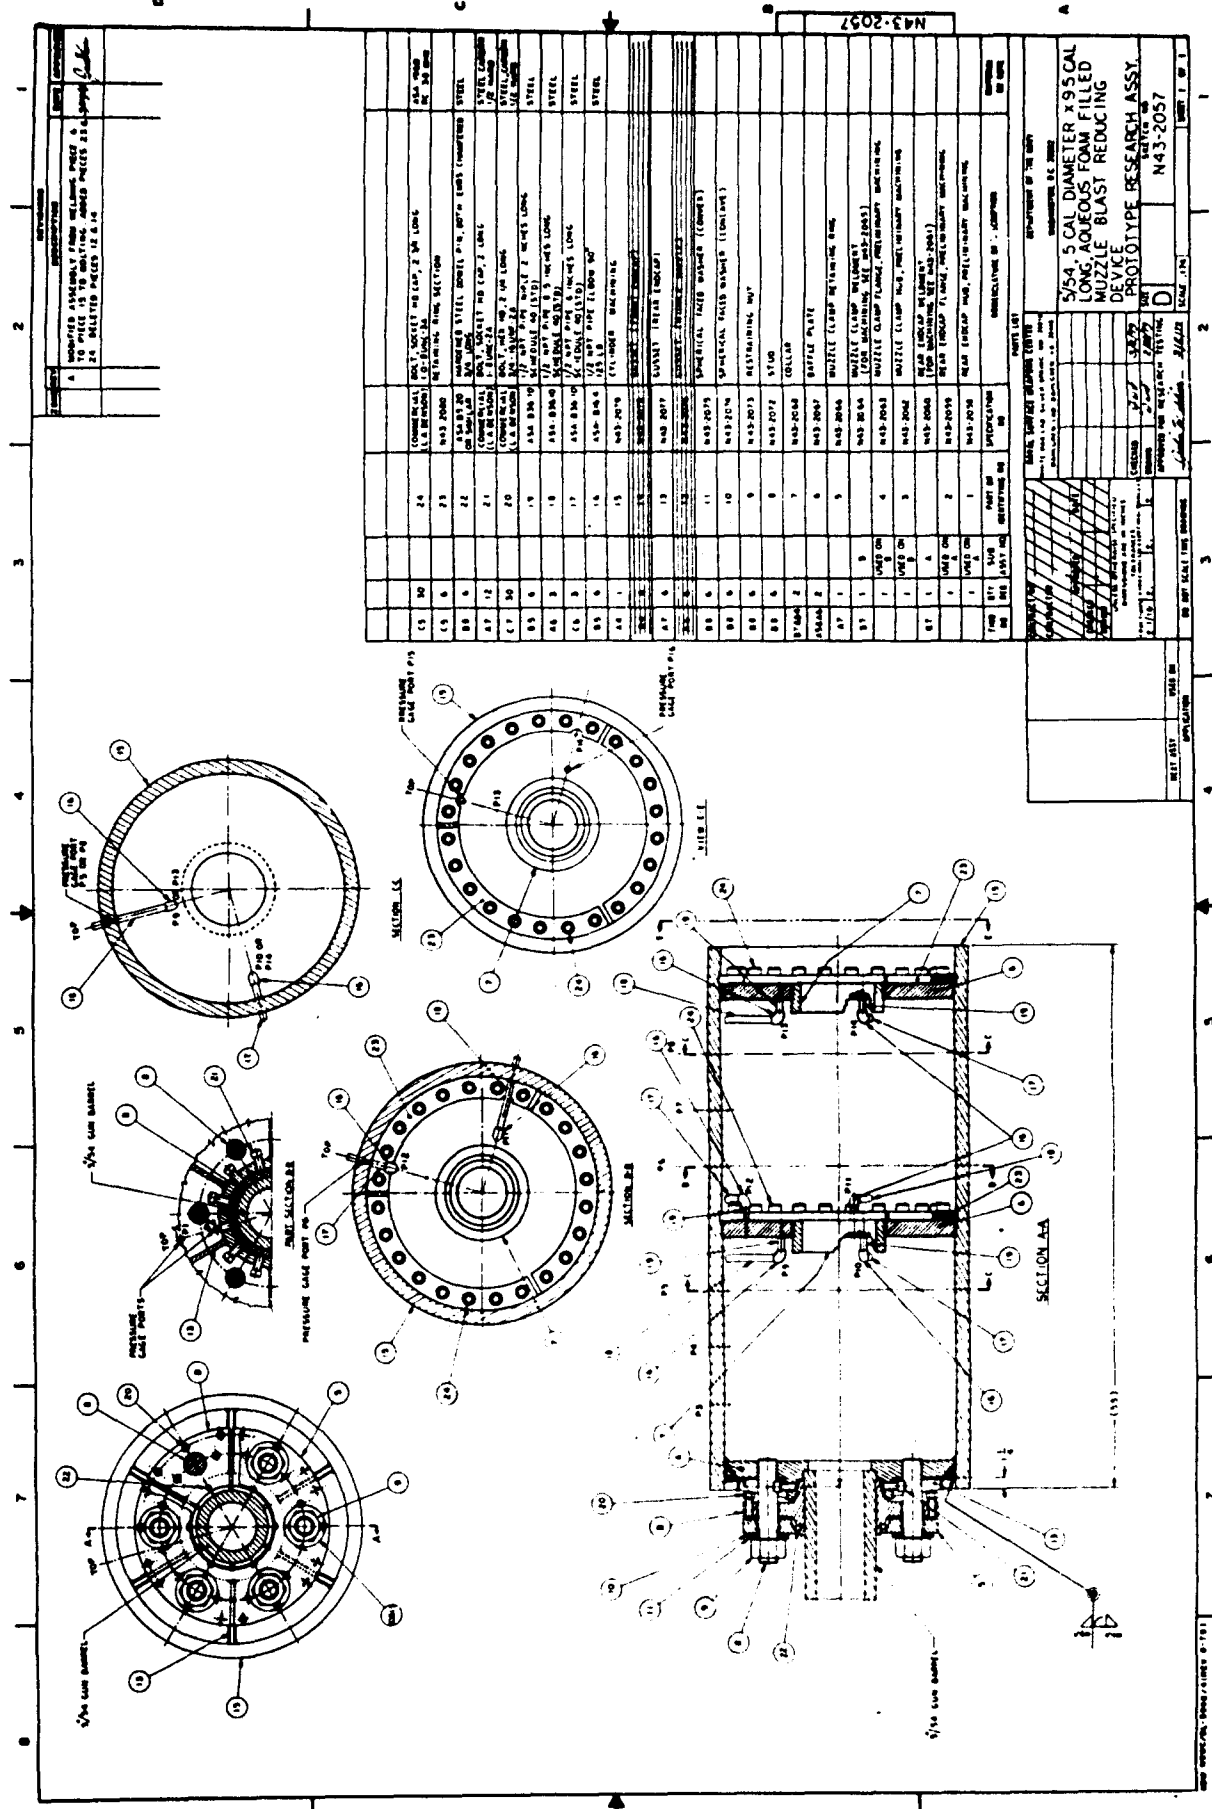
Assembly Drawing of the 5"/54 Muzzle Device
